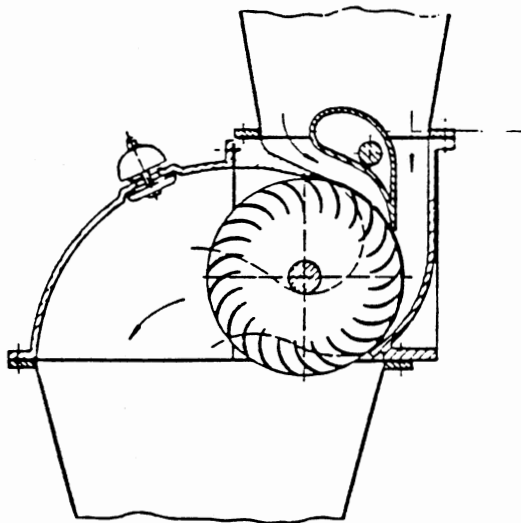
Exploded View of an Ossberger Crossflow Turbine Assembly (Stapenhorst, 1980)
